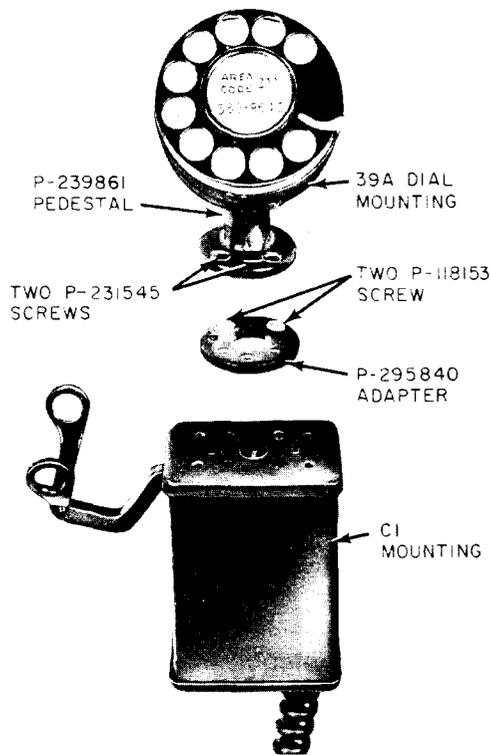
39A Dial Mounting With C1 Handset Mounting
